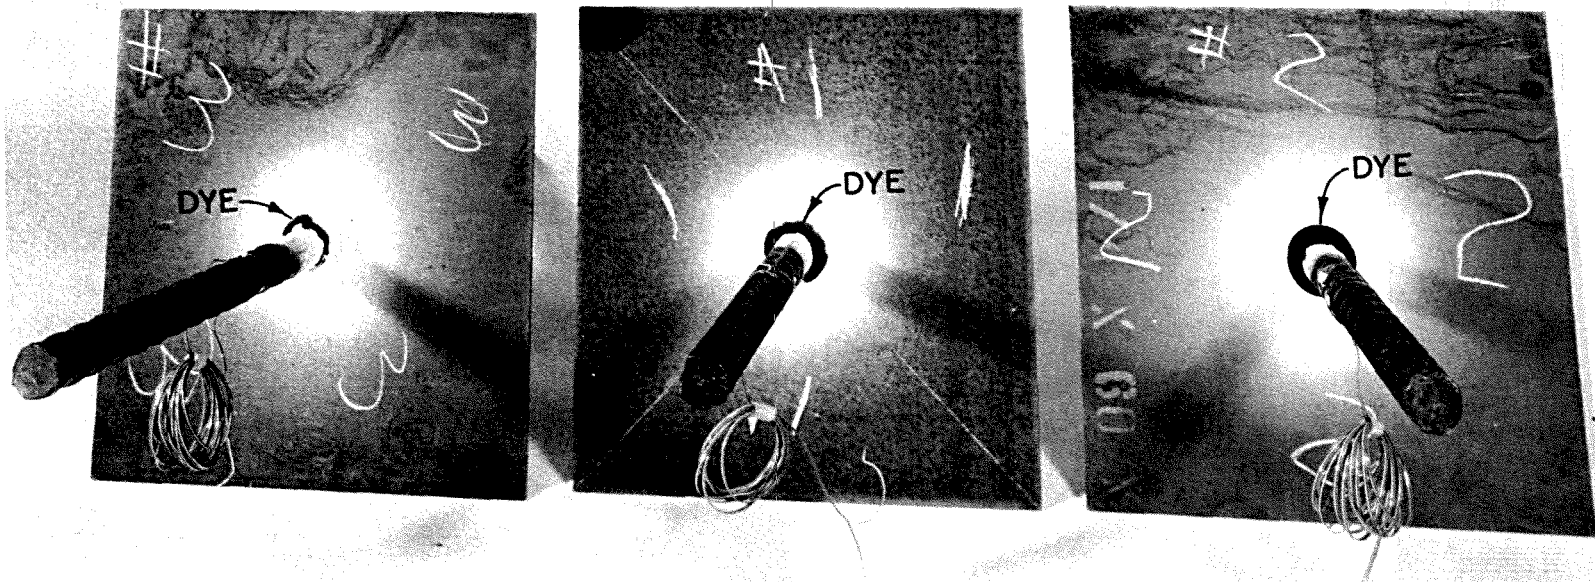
Dye penetrating arc-welded joints of samples prior to tension tests.
